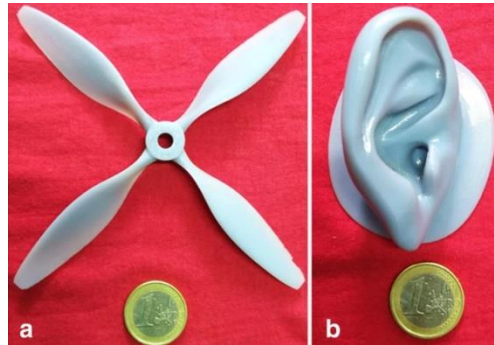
Samples printed using Polyjet printing with a glossy finish. (a) A printed propeller. (b) Human ear [18].
